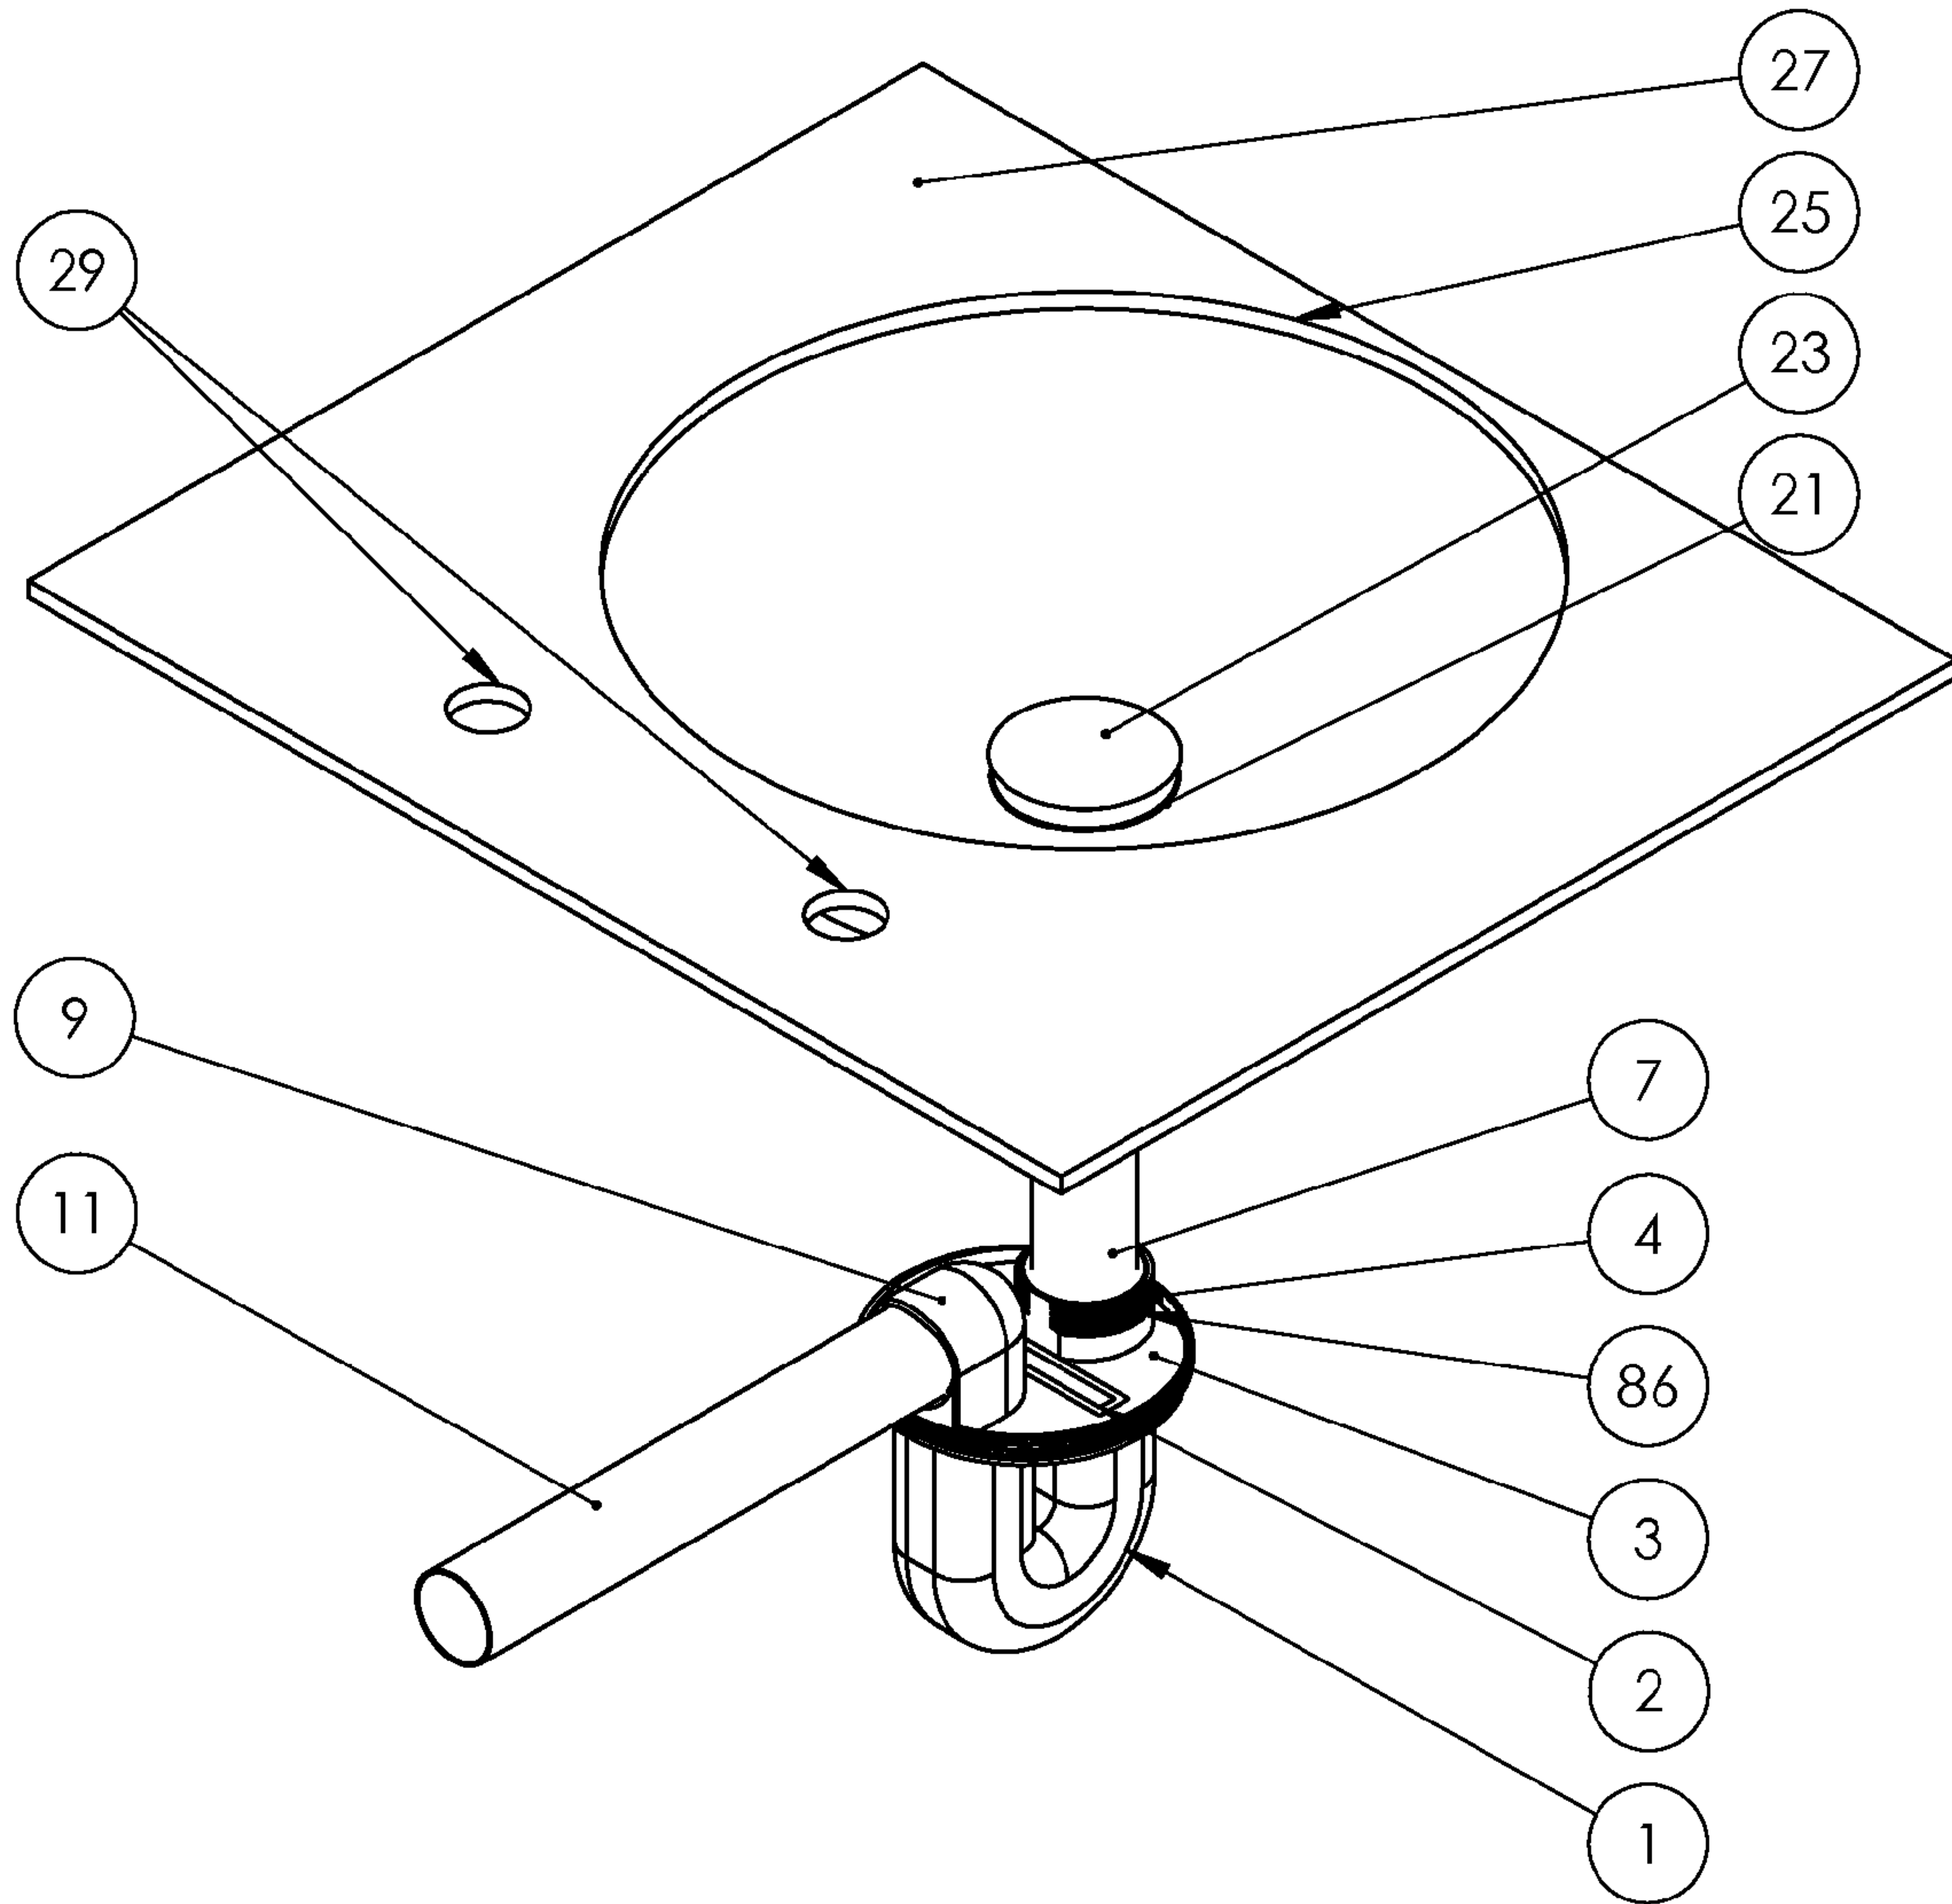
Isometric view of removable trap system showing drain, tailpiece, waste arm, trap, seals, and connecting top.
